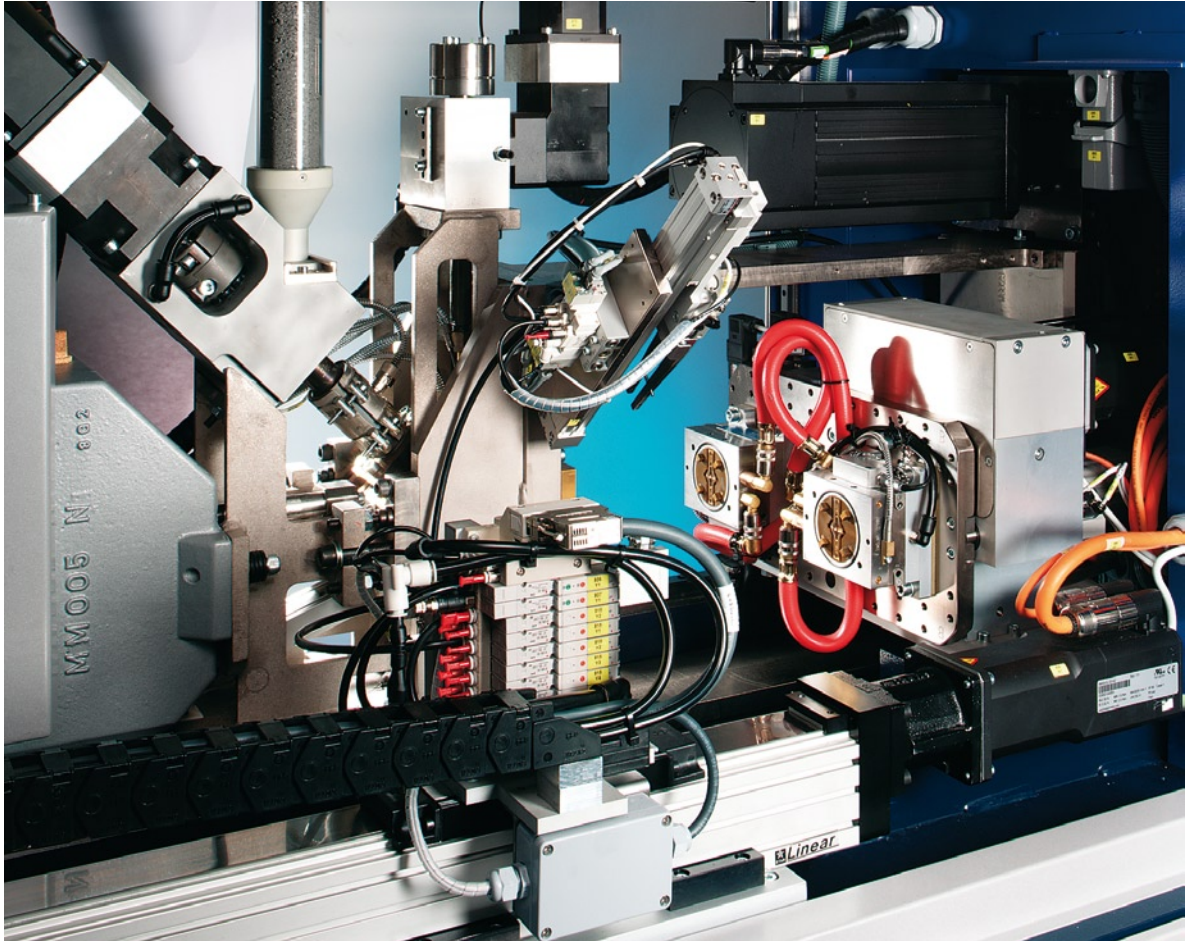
Micro injection moulding machine Battenfeld Microsystem 50.
